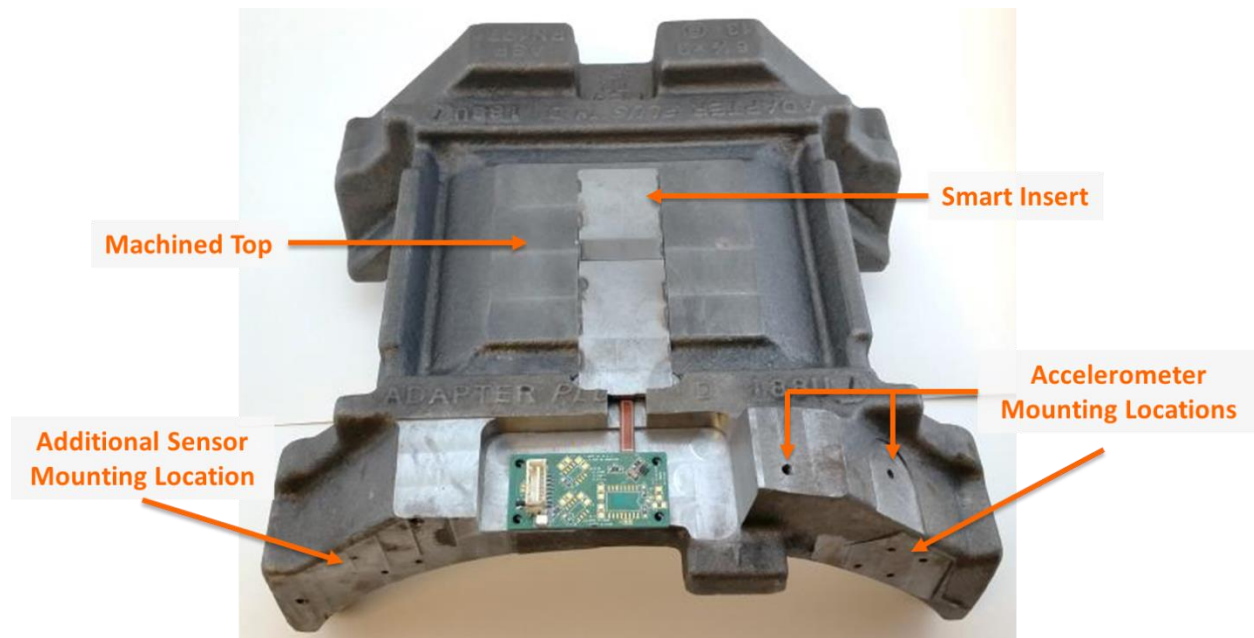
Machined Class K AdapterPlus™ Steel Adapter with Annotations
